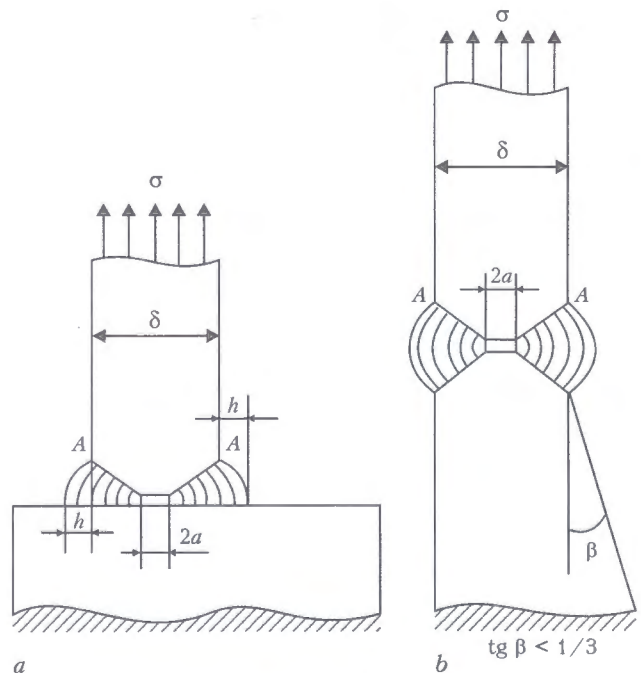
Schematics of welds with lack of penetration in T- (a) and butt (b) welded joints: A-A – zone of least fatigue crack resistance at $a \rightarrow 0$
